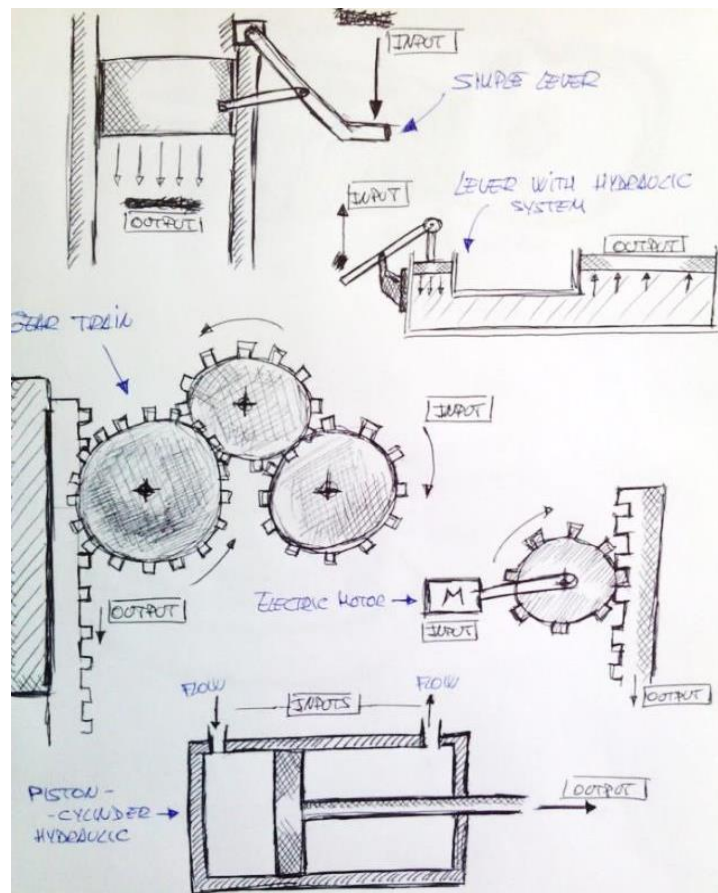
Brainstorming process for a machine which has to perform the necessary movement and pressing force to assemble the work-pieces.
